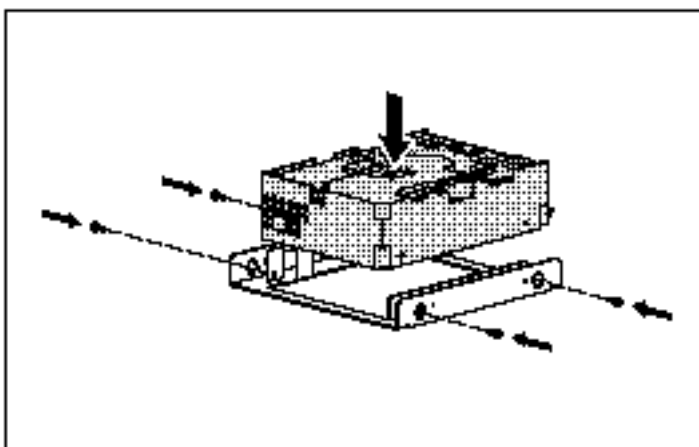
Attaching a 3.5-inch drive to a 5.25-inch bracket
